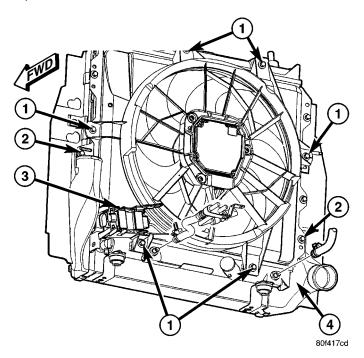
Fan Mounting To Cooling Module - 2.4L Turbo
